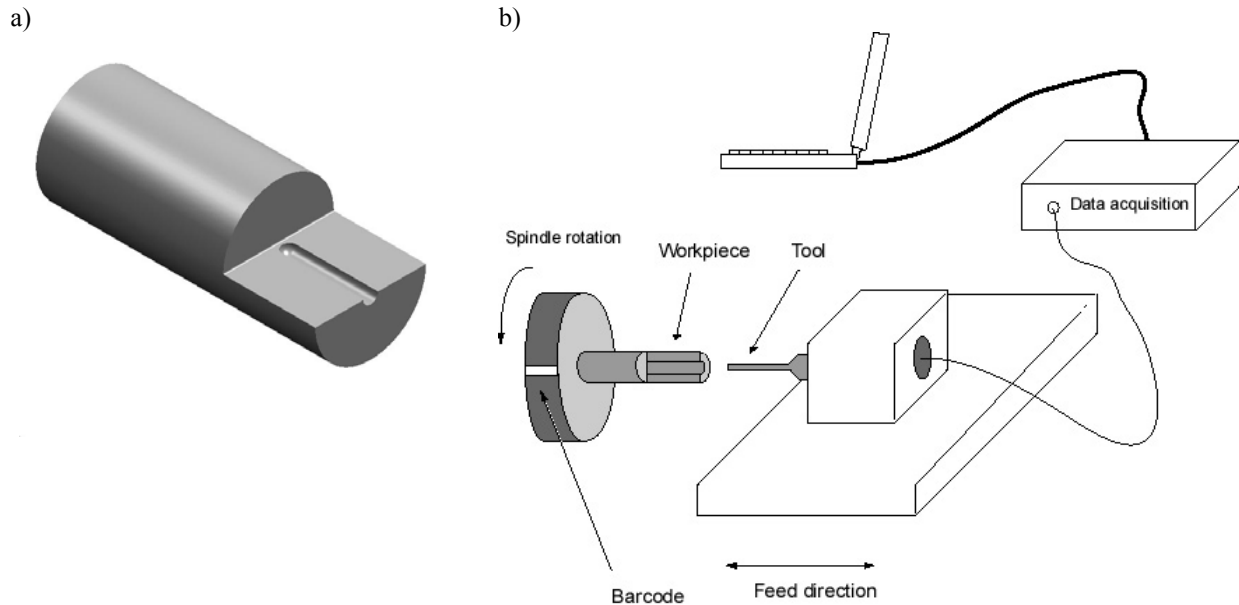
a) Detail of test coupon (workpiece) and b) Cutting test schematic showing test coupon mounted in the lathe spindle and optically instrumented tool mounted to the carriage table; the laser tachometer was focused on the barcode mounted on the spindle housing to mark tooth entry and monitor spindle speed.
